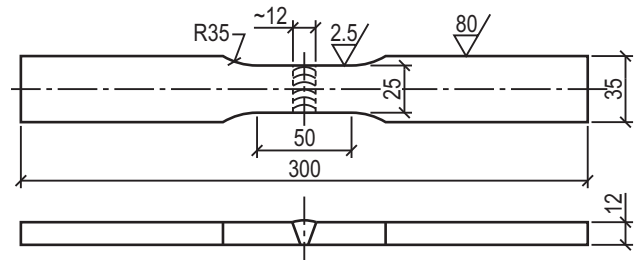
The sample for the tensile test of welded joint with cut excess weld metal
